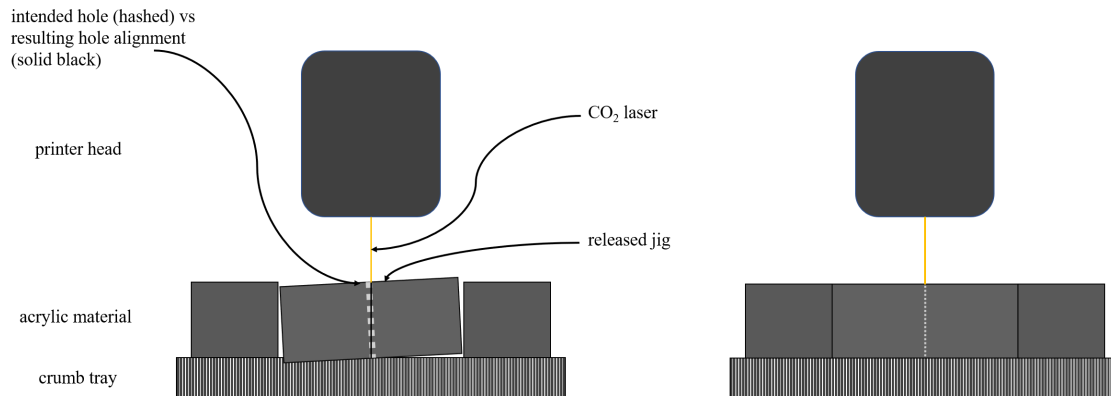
Hole alignment during Holding jig fabrication. (a) Release cut happening before all holes are complete results in misaligned holes. (b) Intended hole alignment
